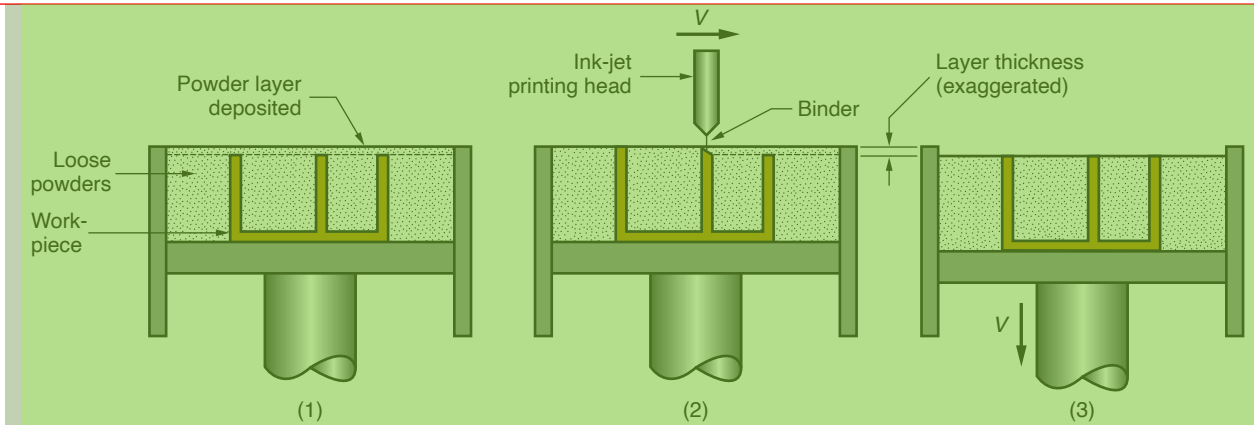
Three-dimensional printing: (1) powder layer is deposited, (2) ink-jet printing of areas that will become the part, and (3) piston is lowered for next layer (key: v = motion).
